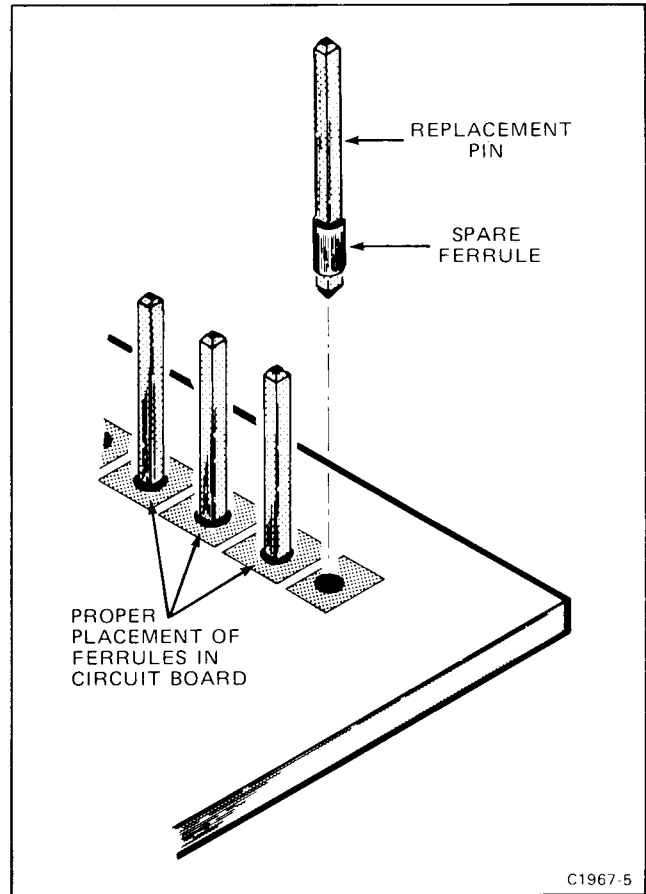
Exploded view of circuit-board pin and ferrule.
